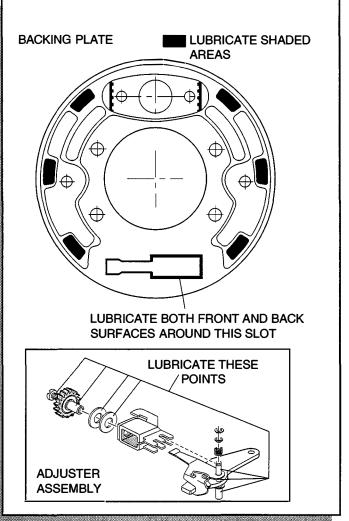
Lubricating Backing Plate and Adjuster Backing Plate Installation
